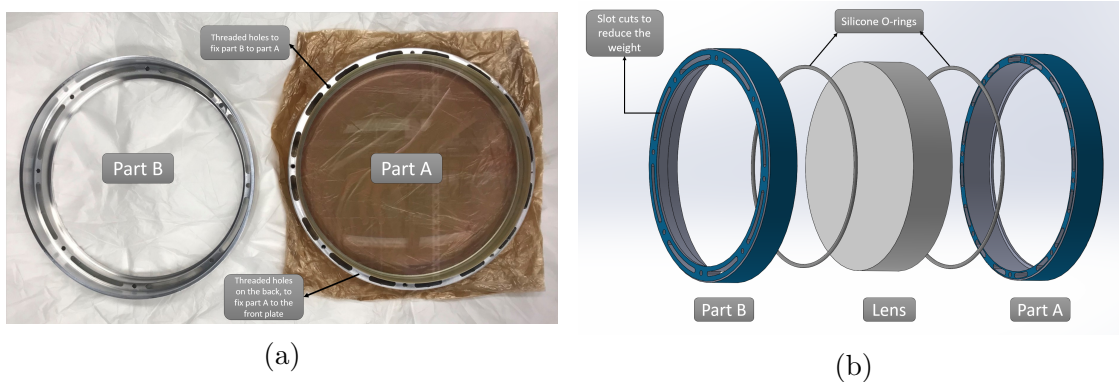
(a) The fitting test of the lens cell before anodization. (b) An exploded view of the designed lens cell in Solidworks. The lens is fixed between the two parts of the cell and two soft silicone O-rings.
